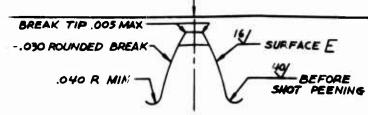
Fatigue Test Gear Configuration 4—EX-78775.
